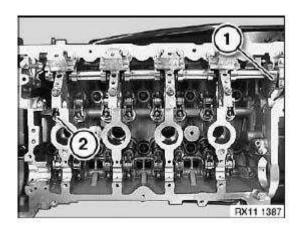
Identifying Eccentric Shaft Courtesy of BMW OF NORTH AMERICA, INC.
